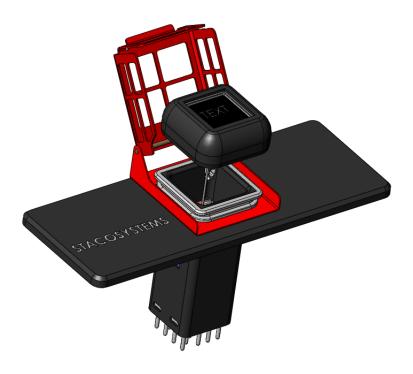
ASSEMBLED VIEW INTO PANEL.
